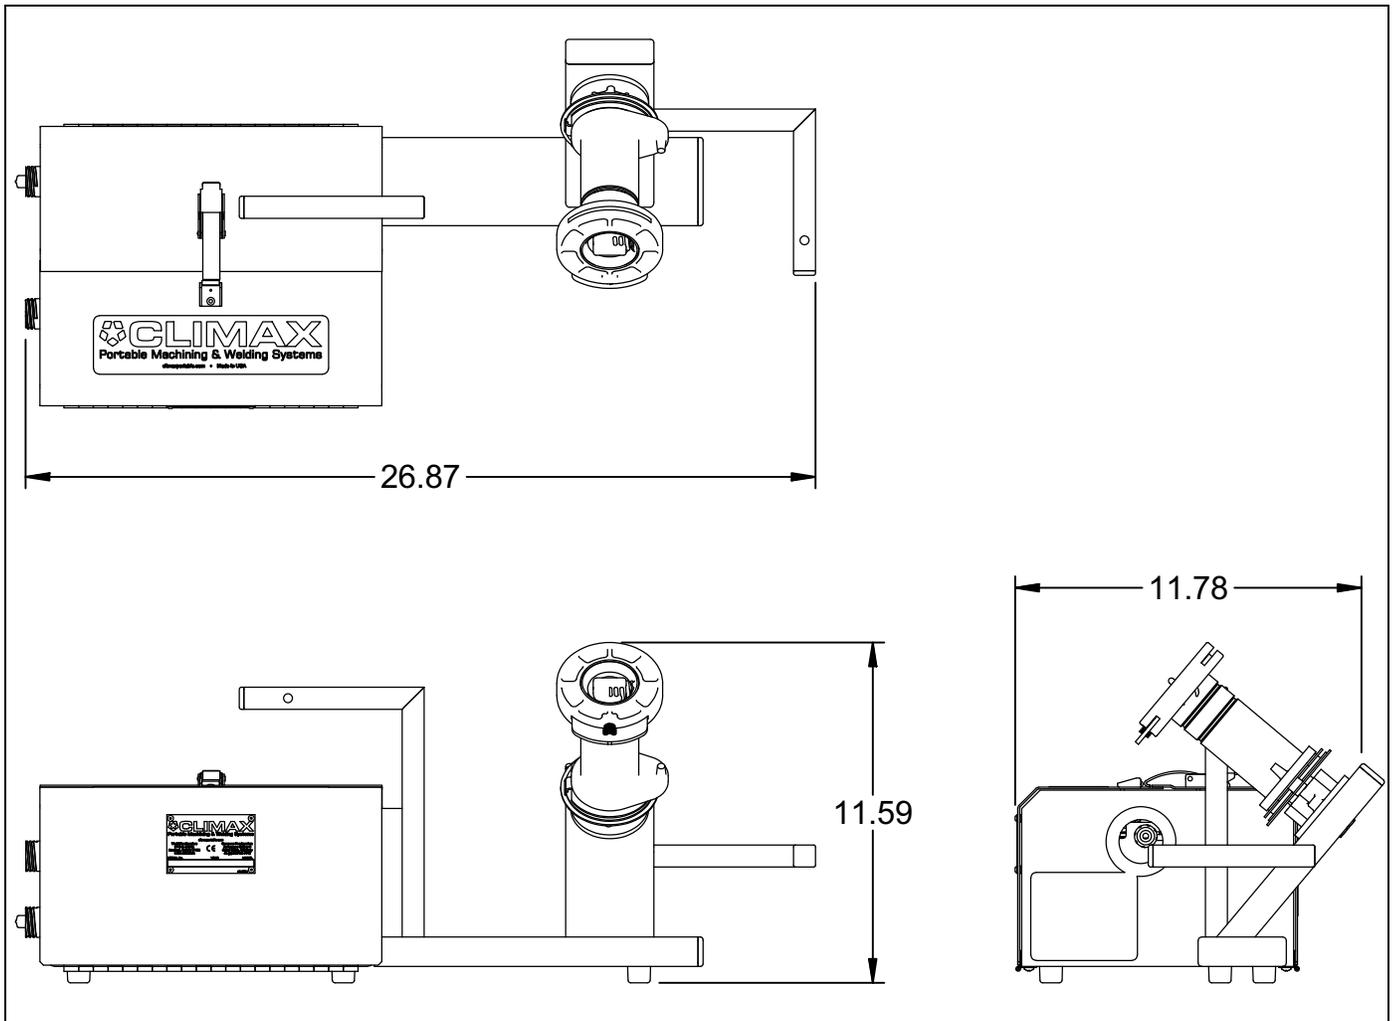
BW3000 DIMENSIONS (RÉF. 103159)
